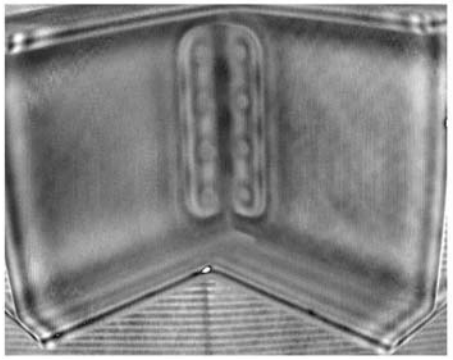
Thermal inspection results for cruciform 1, rivet 2 bottom.
